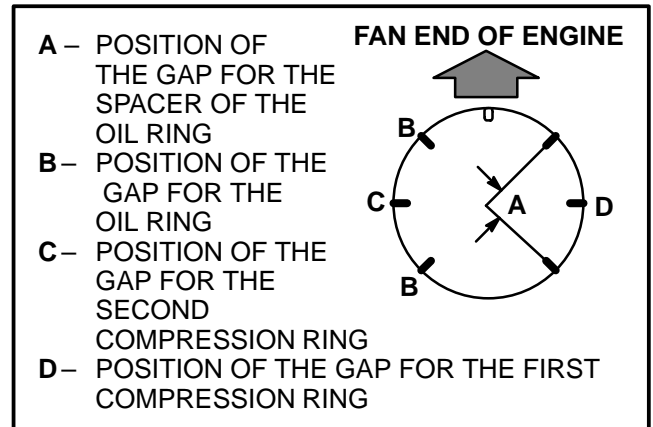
ARRANGEMENT OF THE PISTON RINGS ON THE PISTON
